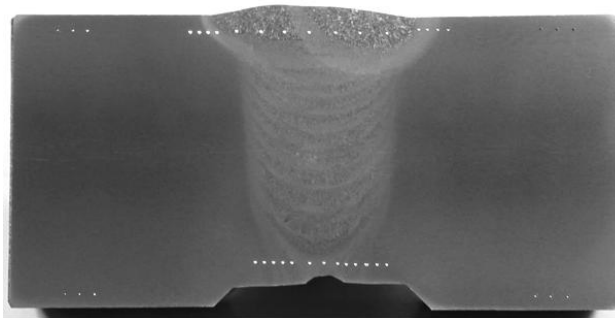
A typical hyperbaric GTAW pipe weld in the 6 o'clock position of a 35.2 mm thick X70 steel Pipe welded under pressure equal to 200 m sea depth¹
